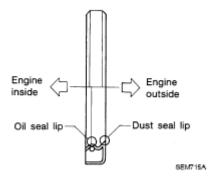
Applying Engine Oil To Both Oil Seal Lip And Dust Seal Lip Courtesy of NISSAN MOTOR CO., U.S.A.
